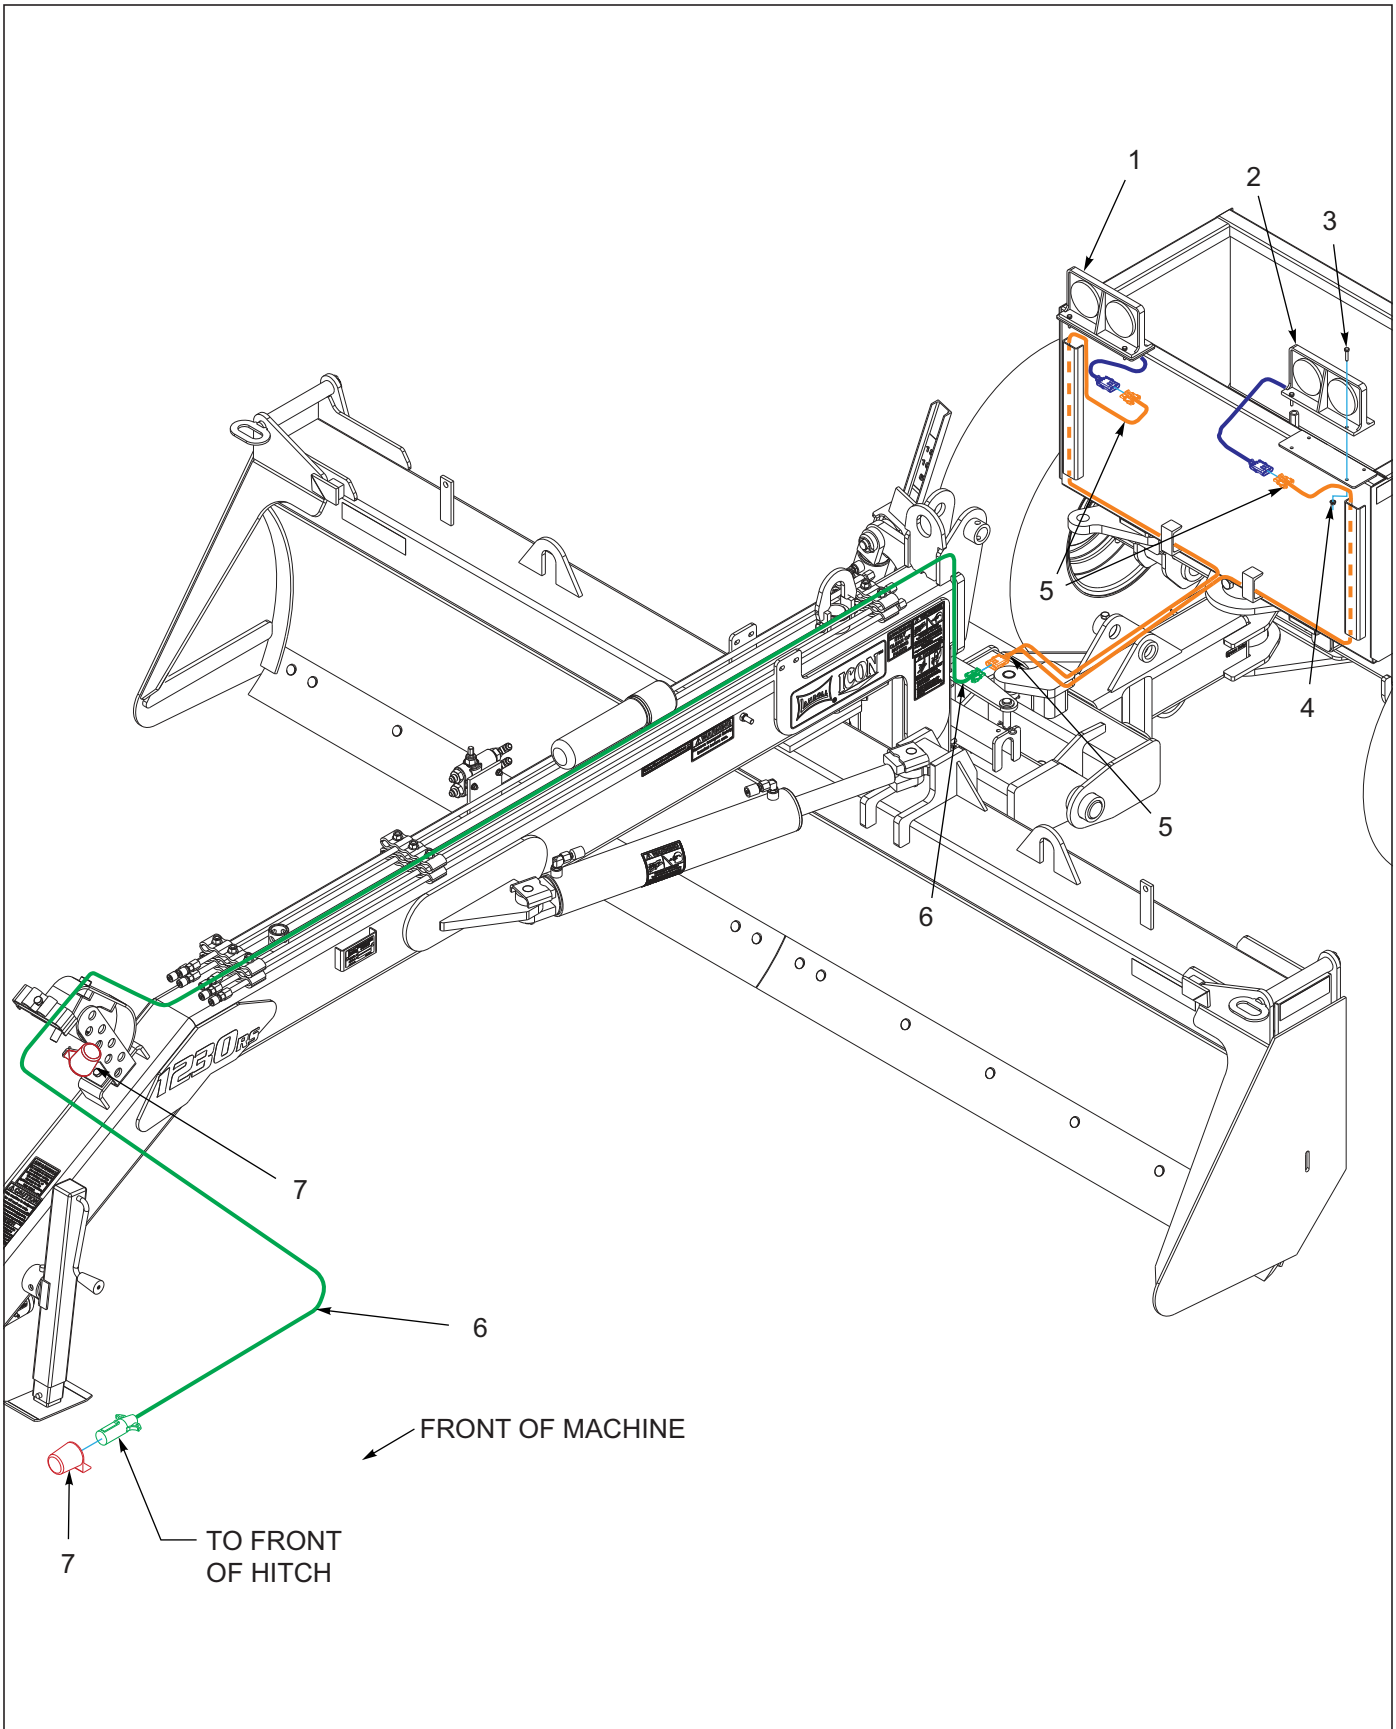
Electrical Assembly (Before 6-1-2016)
